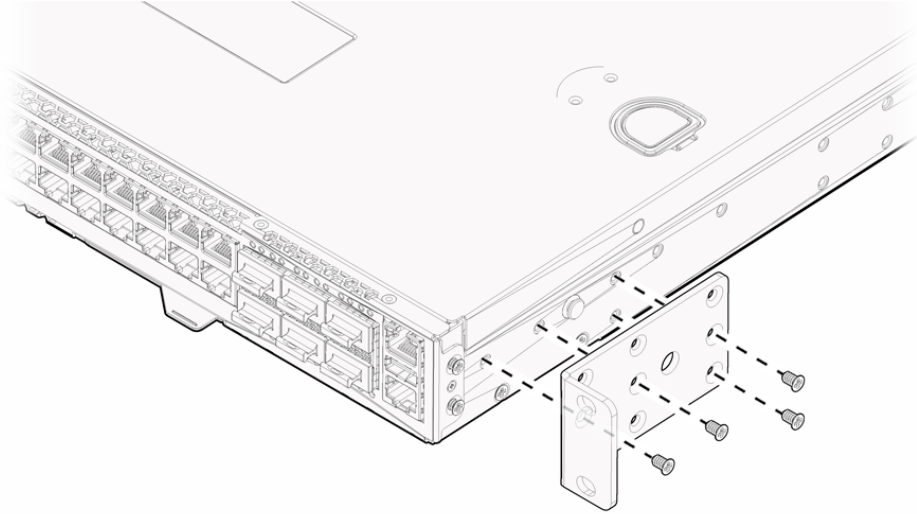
Attaching a Short Mounting Bracket (Ear): Front of Switch
